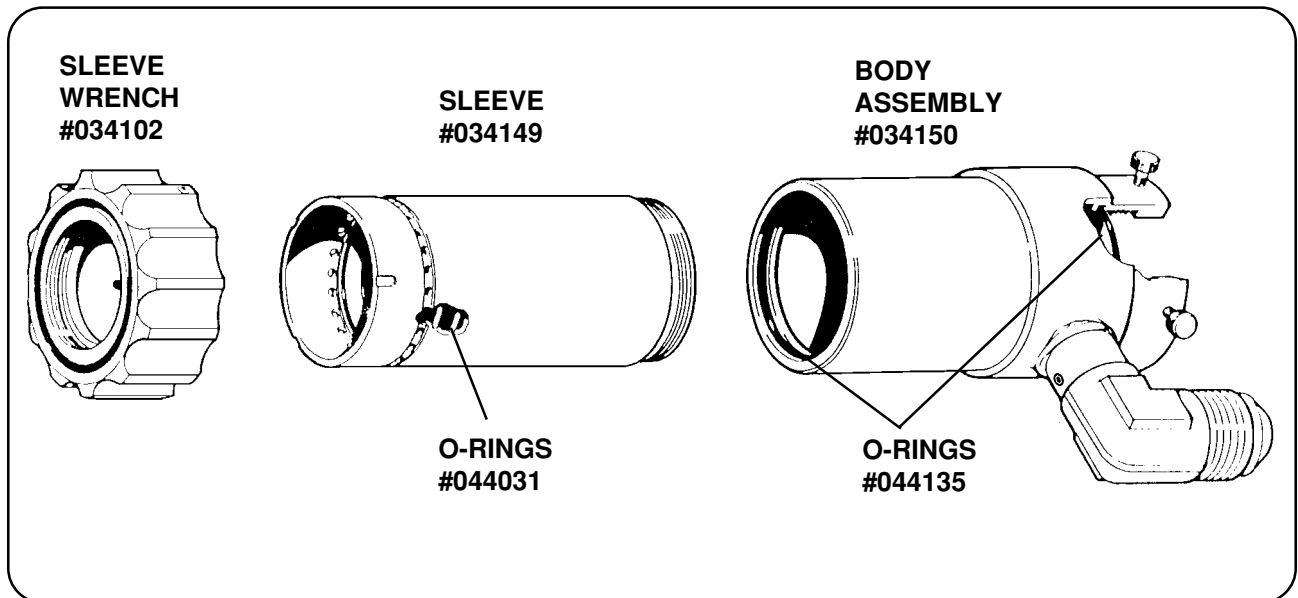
Assemble/Disassemble the Nozzle Assembly
